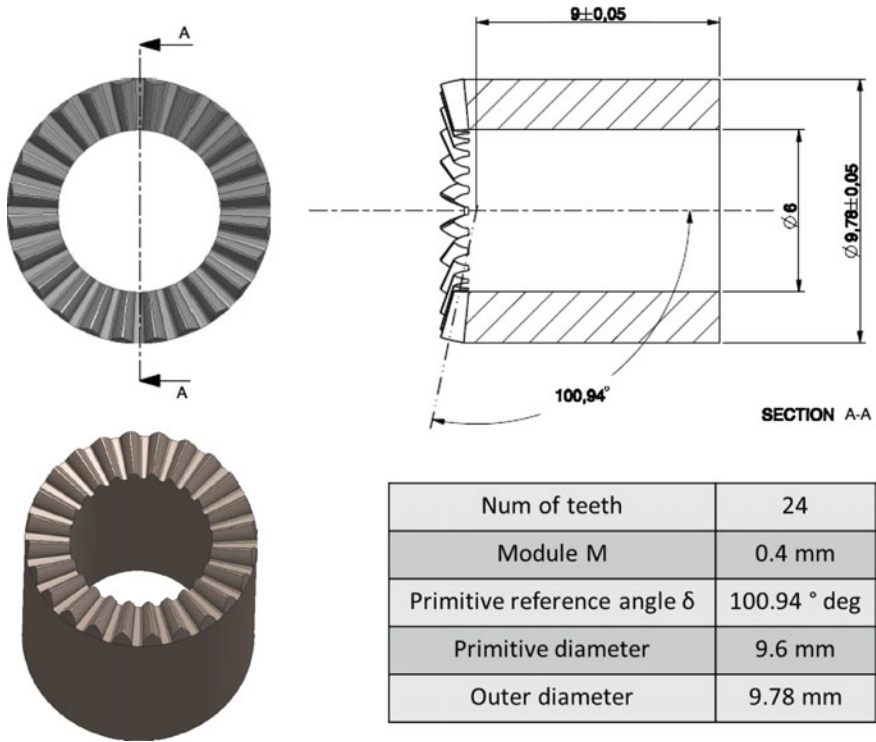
Straight Bevel micro-gear: design and dimensions
